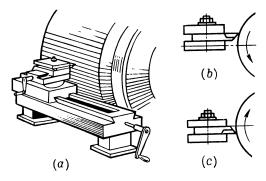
Commutator turning-down tool fitted with a lathe chuck (a) general view; (b) setting the cutter tool in the chuck for commutator rotating counter-clockwise; (c) setting the cutter in the chuck for commutator rotating clockwise
